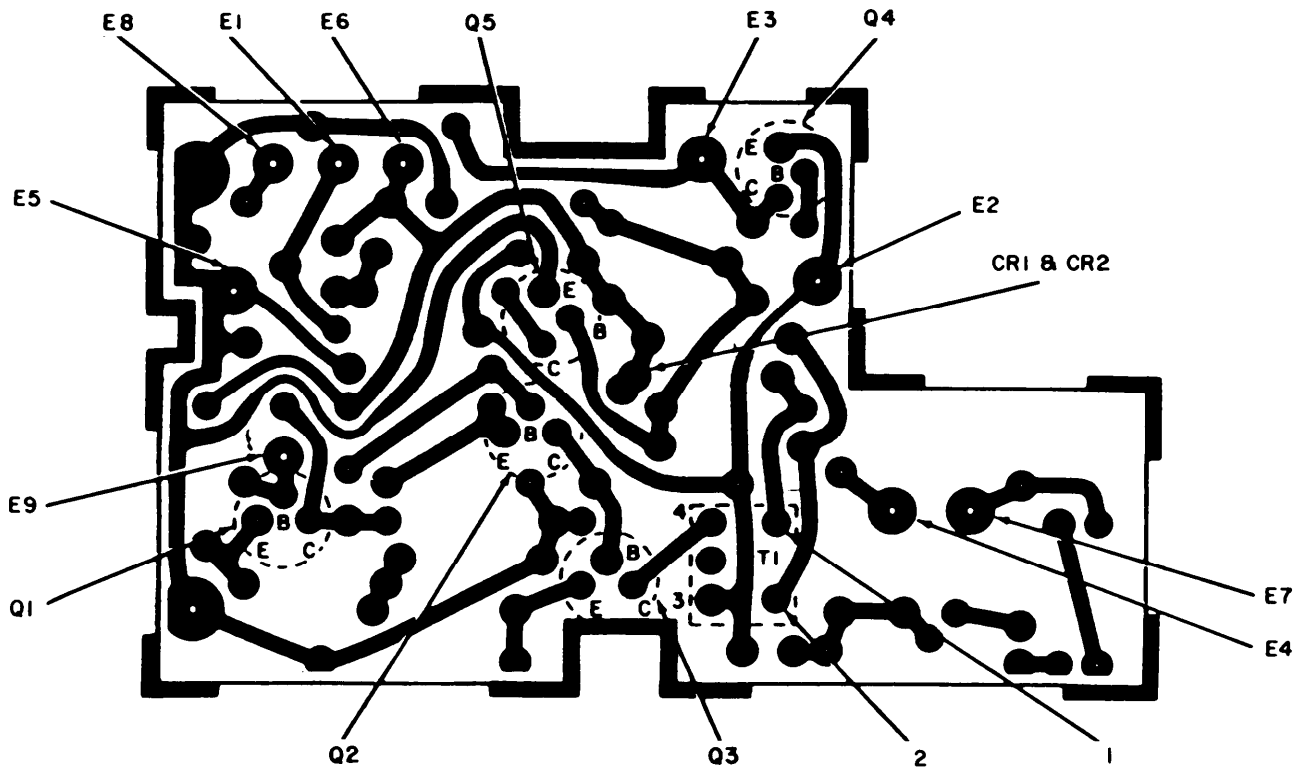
Alarm Control 1RE1AR1A3, Printed Circuit Board
